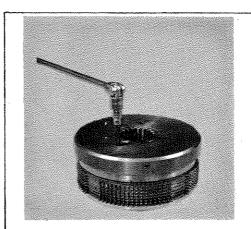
Removal and Disassembly of Bevel Gear Shaft Assembly (Sheet 3 of 3)
